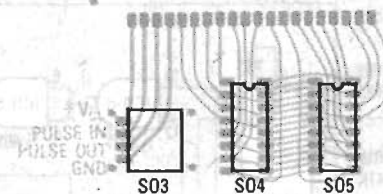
THE B-SOCKET BOARD parts placement. Note that S03 is a small solderless breadboard socket.
